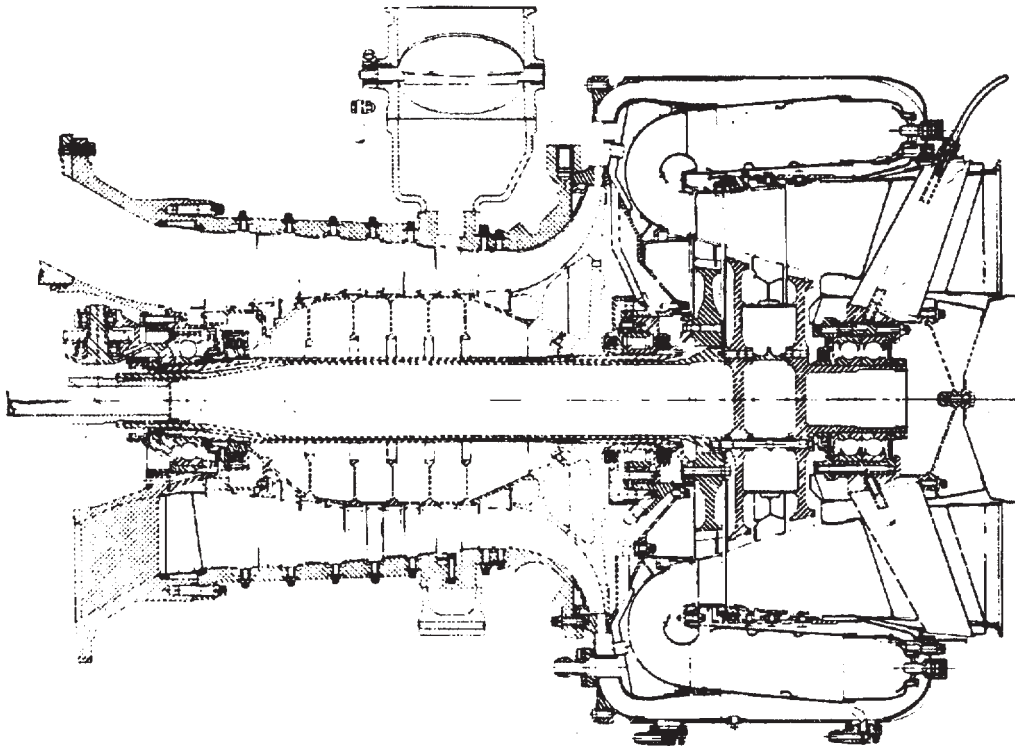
Cross Section of Lycoming TF20 Gas Turbine Engine
